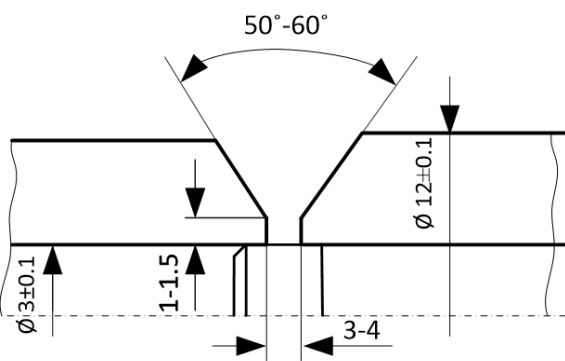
Single 'V' butt joint used for the second case of welding reconditioning
